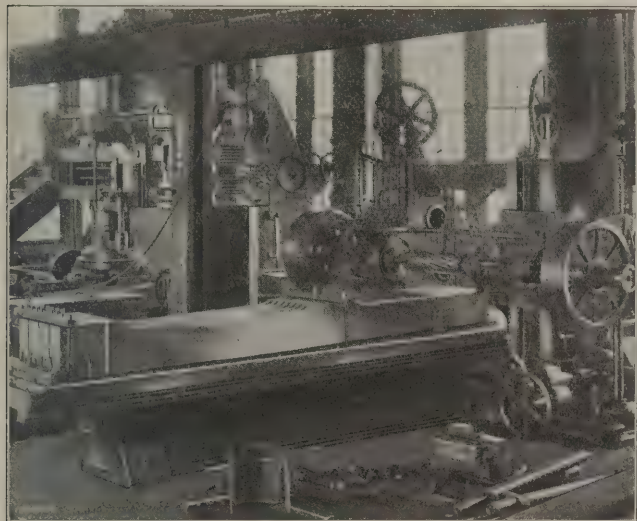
Eight Trailer Frames set up for Milling the Edges
